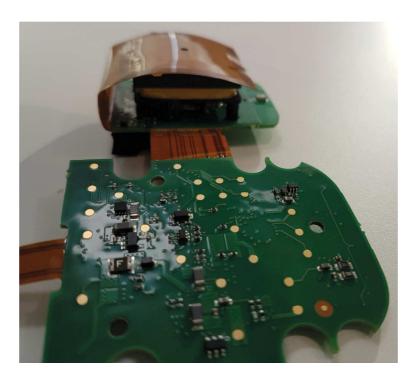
Close up view of Radio Module and flexible PCB with radio coil
